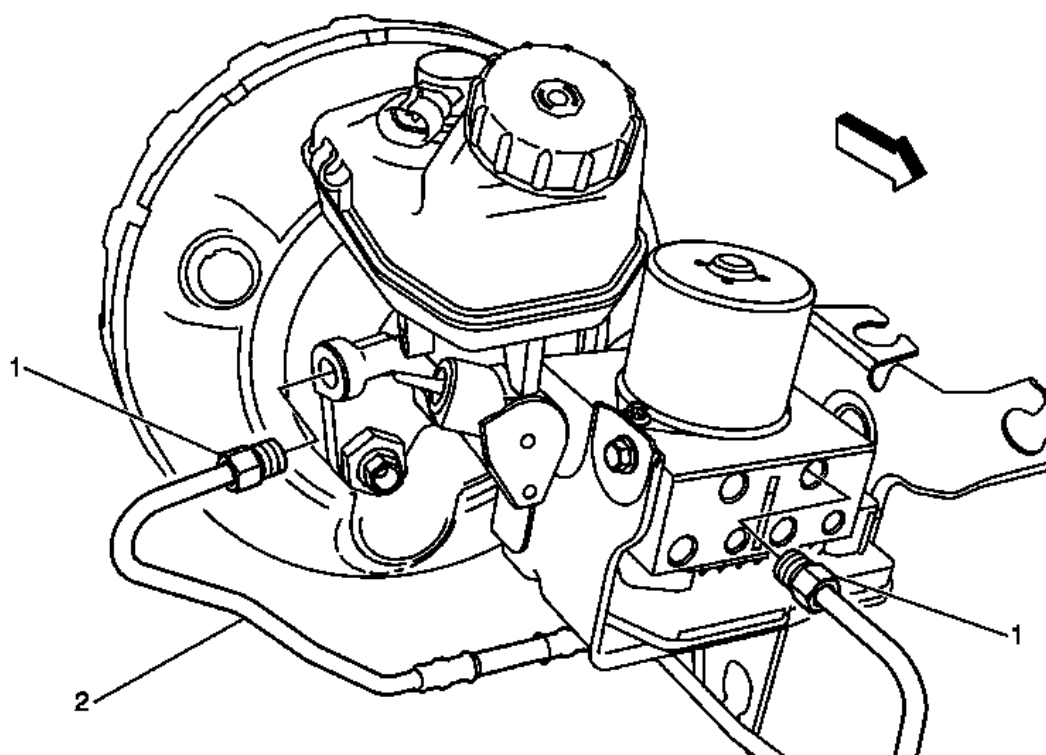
Brake Pressure Modulator Valve Primary Pipe (Left Hand Drive)
